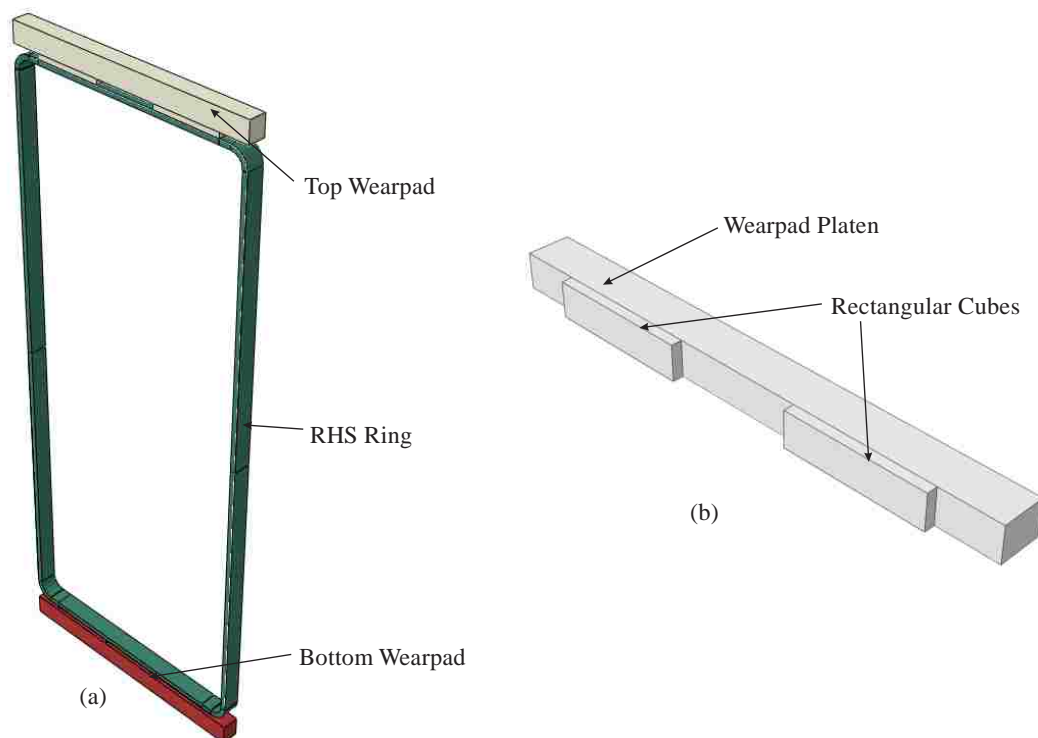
(a) RHS ring between wearpads assembly (b) Wearpad parts
